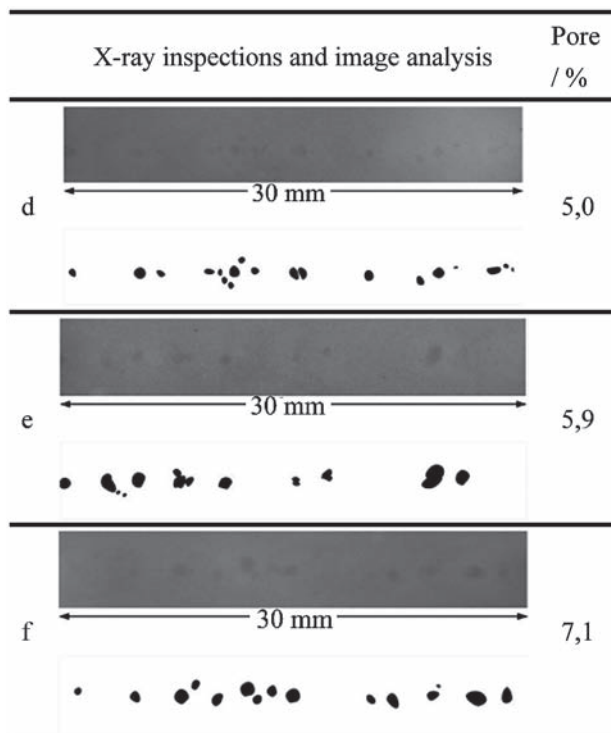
X-ray inspections and porosity content of weld bead in various laser powers (d - 3 kW, 2 m / min; e - 3,5 kW, 2 m / min; f - 4 kW, 2 m / min)
